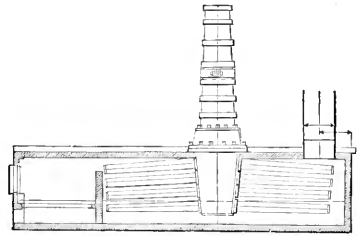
STEVENS'S "SECTIONAL" BOILER, 1804.
